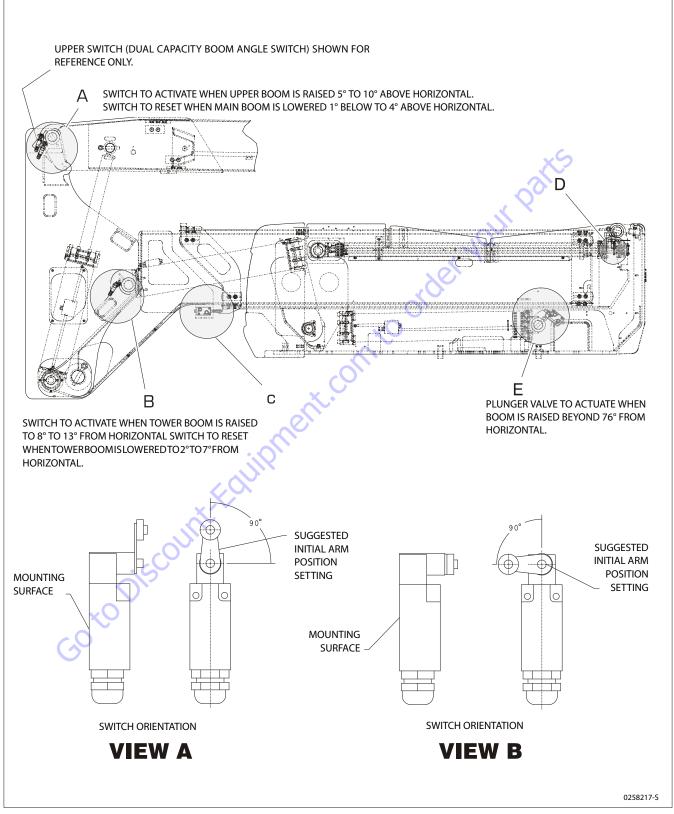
Boom Valve and Limit Switches Location (Sheet 1 of 3)
